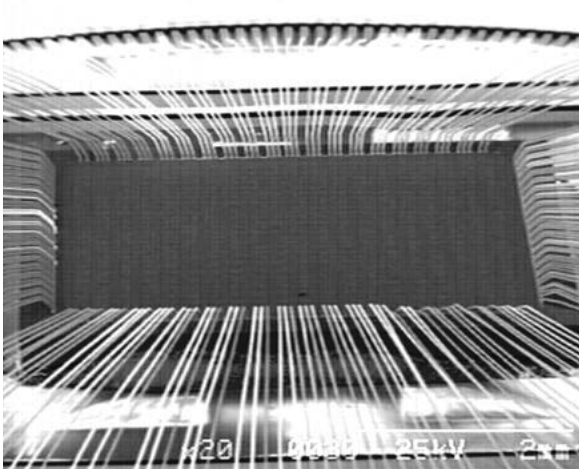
50µm pitch package using 0.0009 in./23µm gold wire
